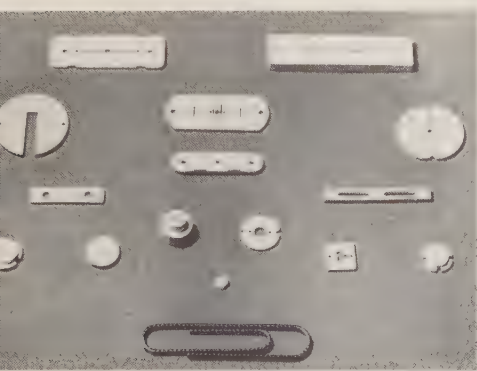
These are typical small ceramic parts manufactured by pressing.
